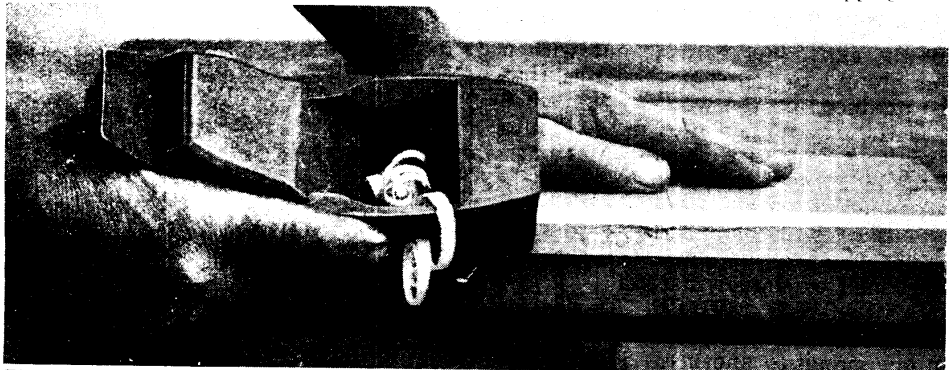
After the rough edge is taken off a smoothing plane is used. The angle should be frequently tested with a bevel square
